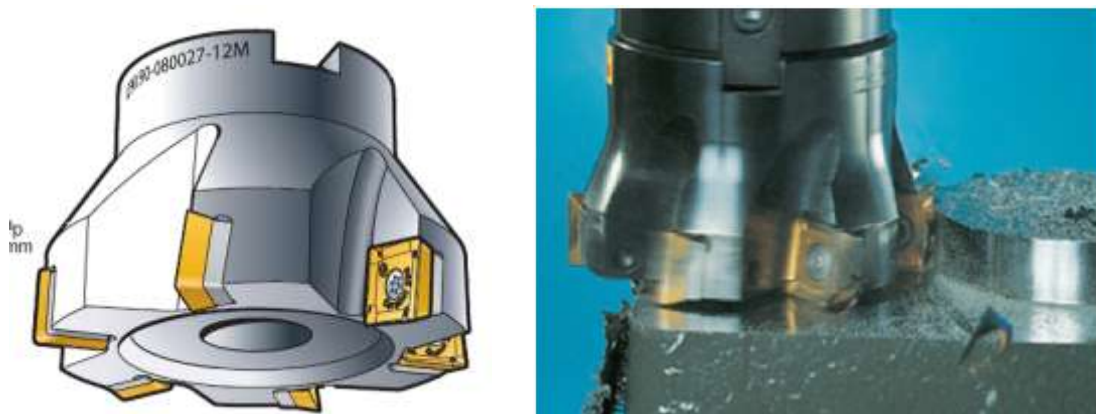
Coromill milling cutter produced by Sandvik Coromant [6]
